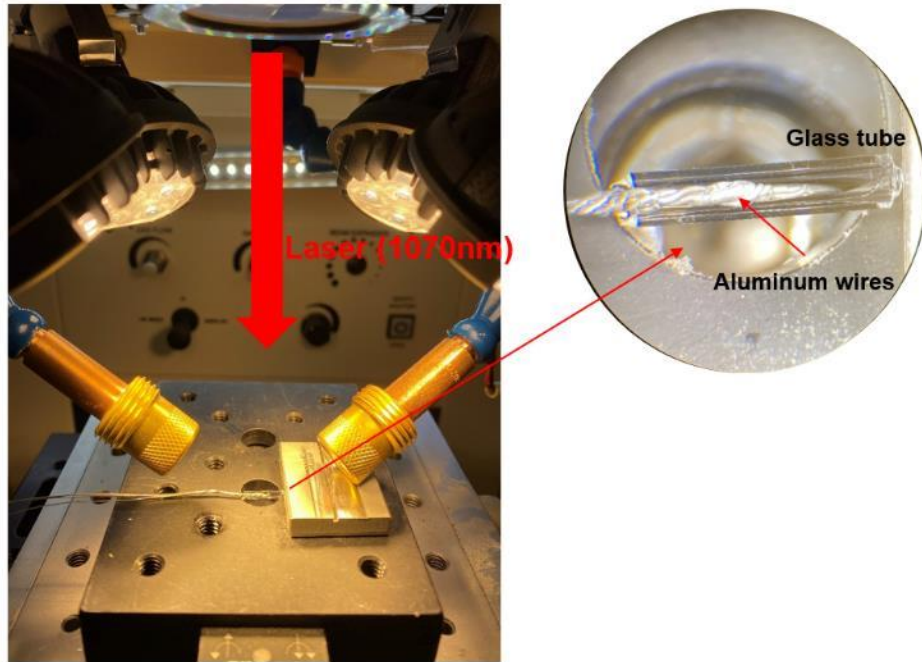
1070 nm laser welding of several aluminum wires.
